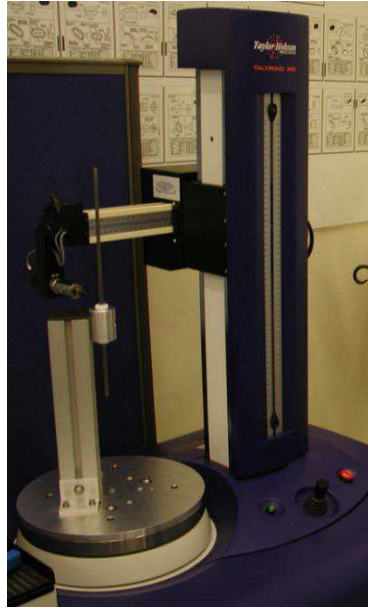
Talleyrond with jig, jig being aligned vertically for shaft measurement using gauge rod.
